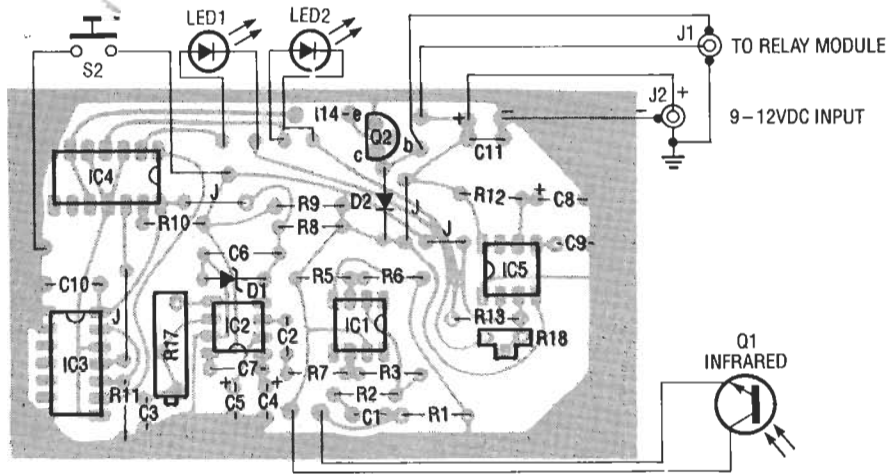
STUFFING THE IR-RECEIVER PC BOARD should present no special problems.
